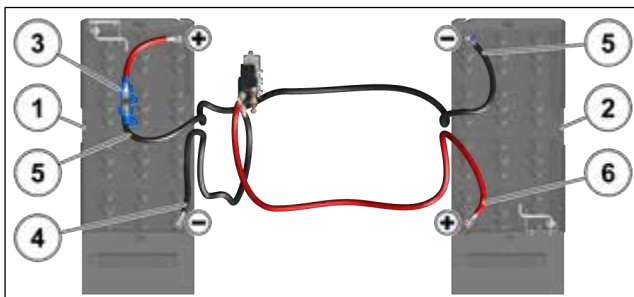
Replacement of high-voltage batteries 2 - up to machine no. MAN00000J01101633
